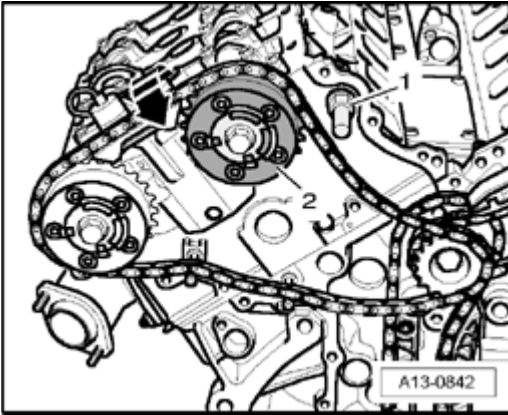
Removing Pivot Pins & Timing Chain For Cylinder Bank 2 (Left), Beginning At Intake Camshaft Adjuster
